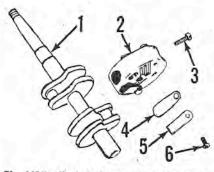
Exploded view of crankshaft and center main bearing assembly.
